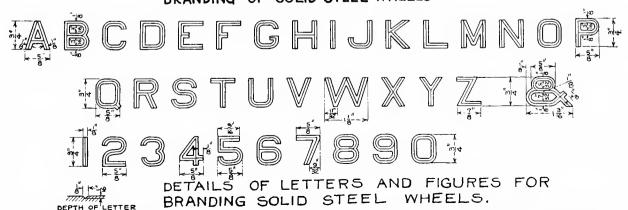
M. C. B. Recommended Practice for Branding Solid Steel Wheels and Details of Letters and Figures. (M. C. B. Sheet C2.)
